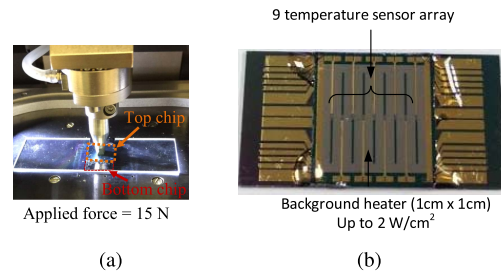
(a) Flip chip bonding assembly and (b) assembled two-tier testbed.
